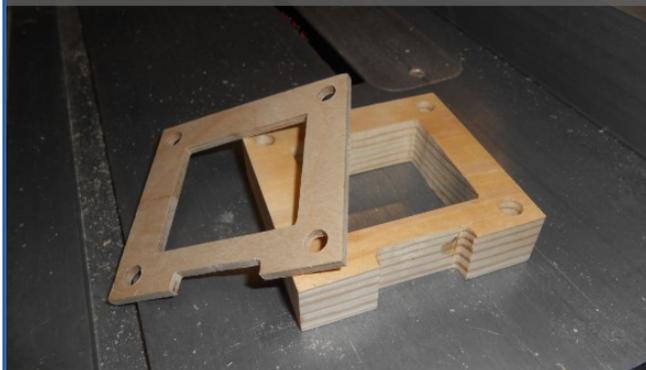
The carburetor is going to stick out like a sore thumb but maybe it can be disguised as a Continental rocker cover.
